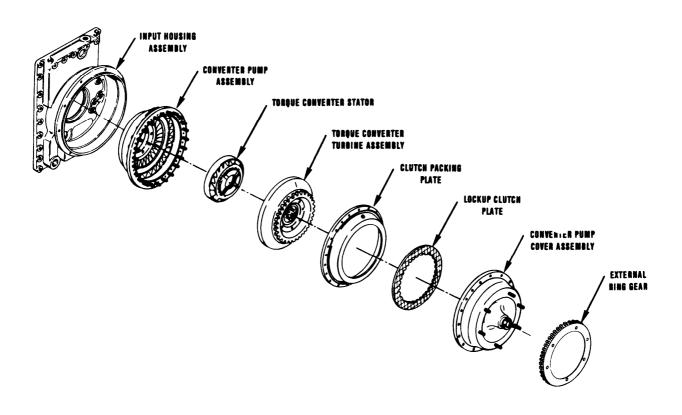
Input Housing and Exploded View of the Torque Converter
